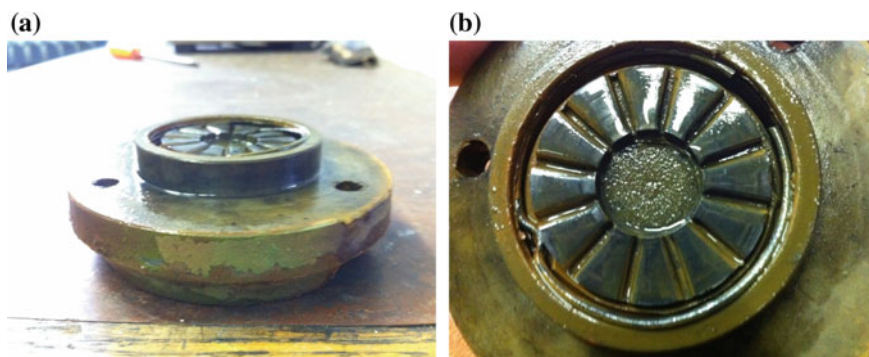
Plain thrust bearing in submersible electric motor: a side view and b top view
